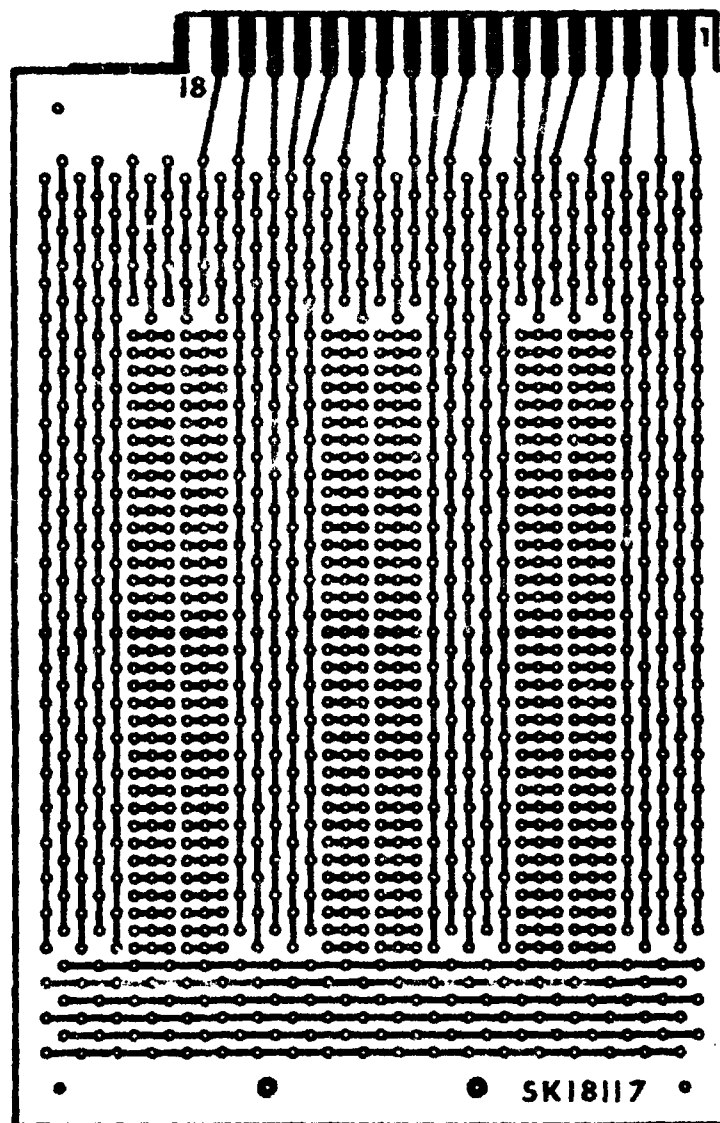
GENERAL PURPOSE PRINTED CIRCUIT BOARD
